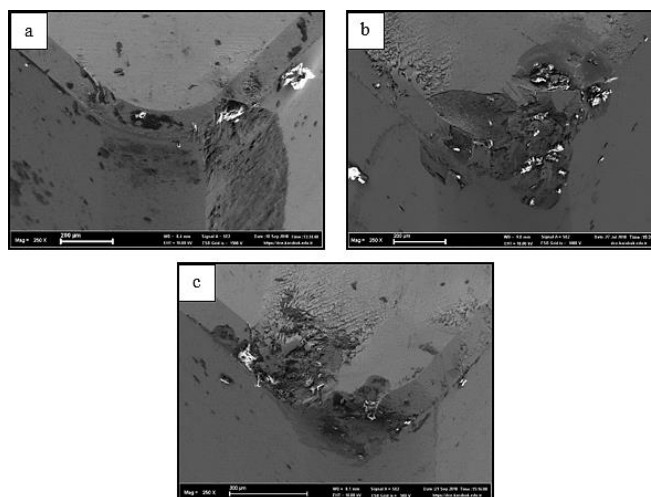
SEM images of the cutting tools worn at maximum F_c and R_a during the machining of the workpieces cooled in the polymerized water.
